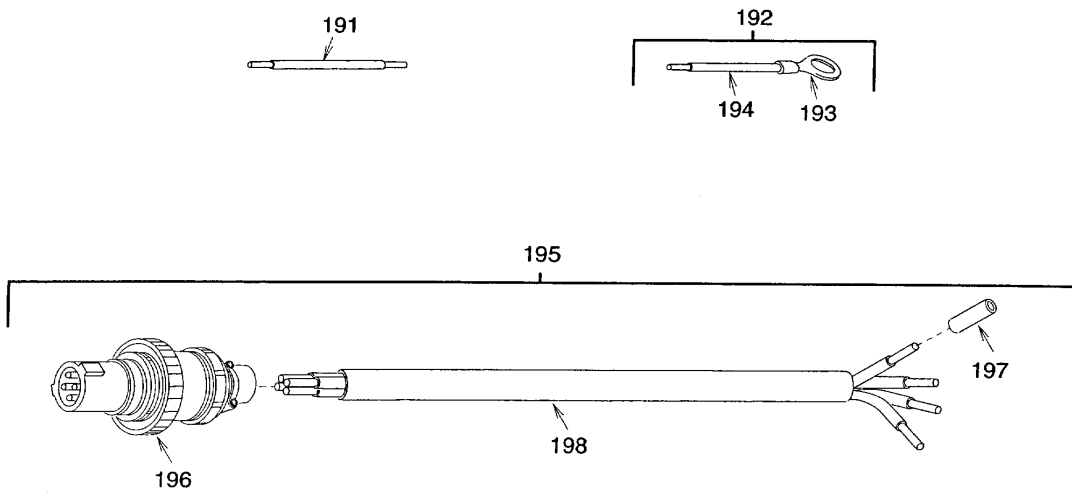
Control Box Wires and Cables (Sheet 3 of 3)
